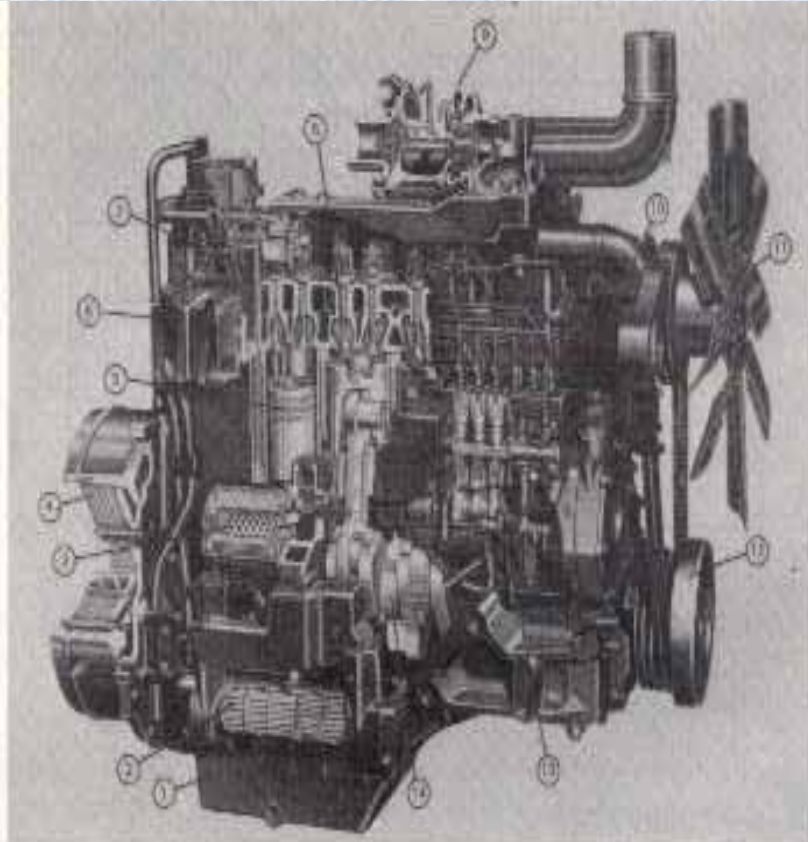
Six-cylinder diesel engine for large tractor. (Courtesy Deere & Co. Key)
